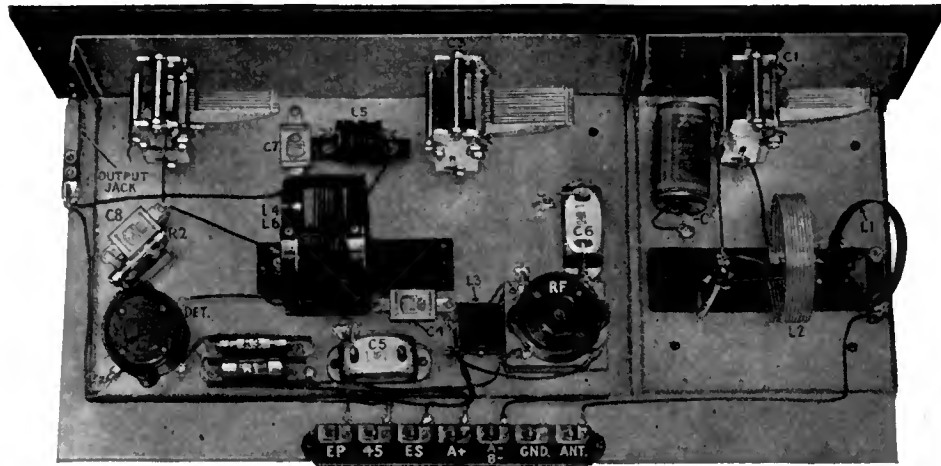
LAYOUT OF PARTS ON BASEBOARD
